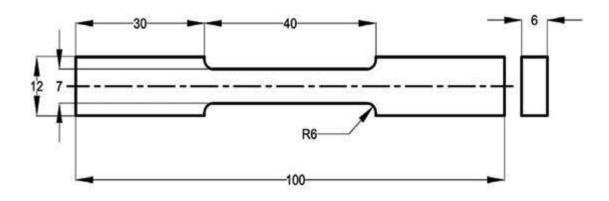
Dimensions of the tensile test sample according to ASTM E8/E8 M-11 standard.
